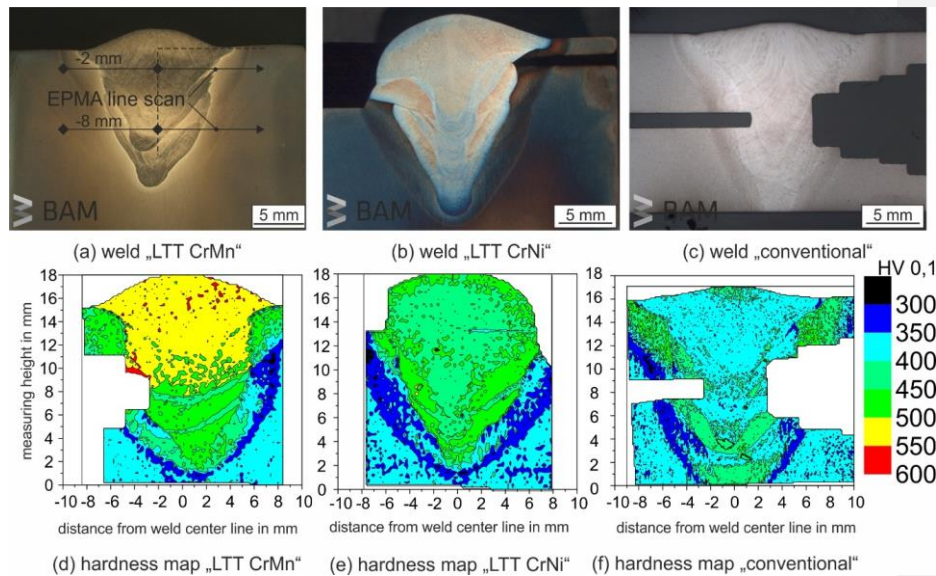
cross section of the joints after welding of the final pass (above) and hardness mappings (below)
